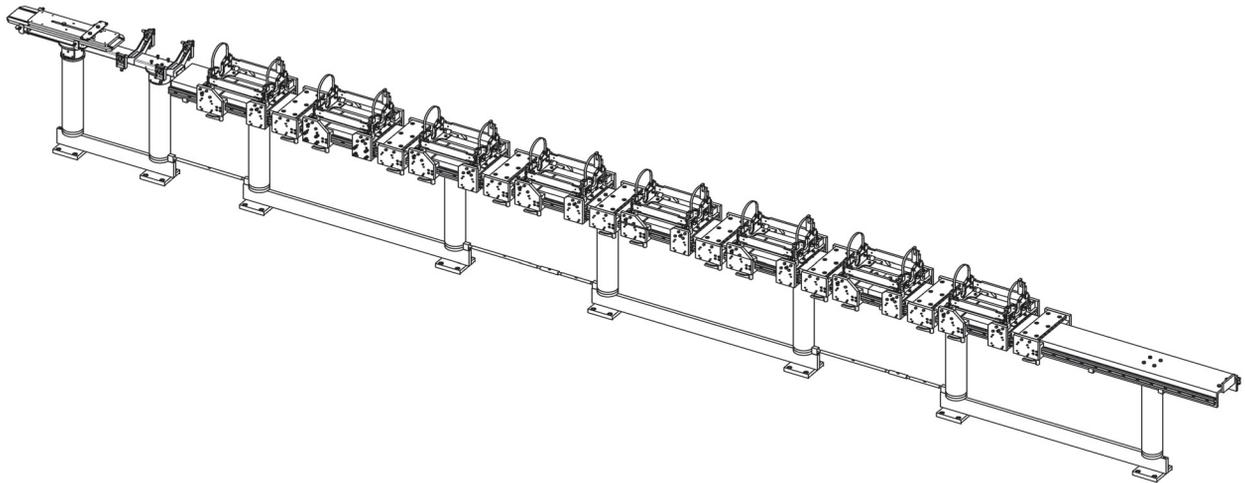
3-D drawing of the assembly platform for eight 3.9 GHz resonators with alternating power coupler orientation.
